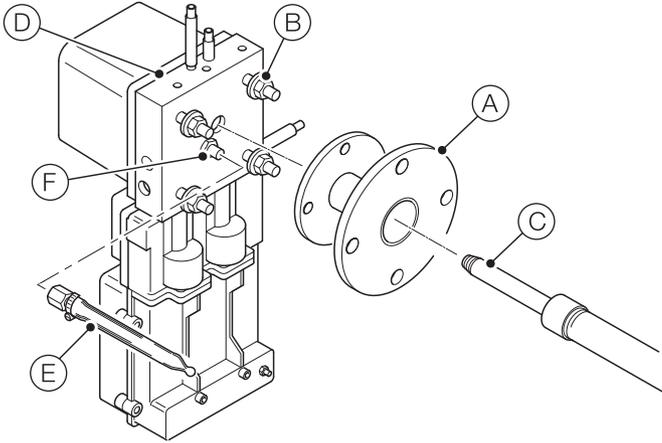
Removing the probe, exhaust filter, adaptor flange from the sensor
